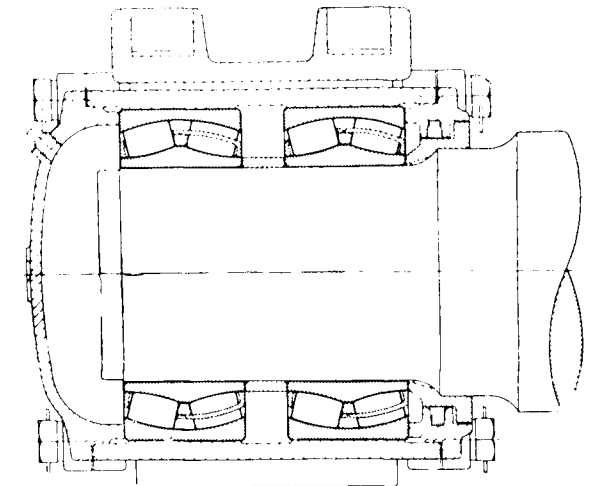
Axlebox for American passenger coaches, electric locomotives and diesel locomotives with axle loads up to 24 tons, and manufactured to A.A.R. standards.
